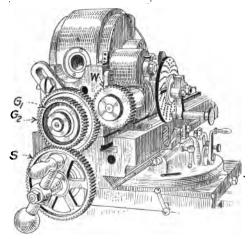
B. & S. spiral head arranged for spiral milling.
